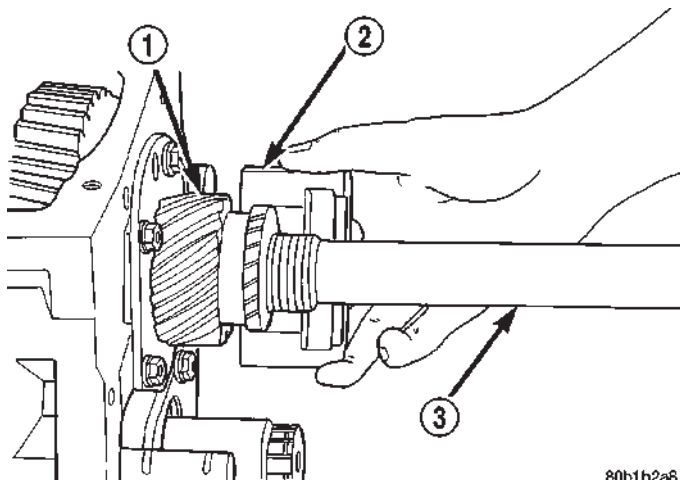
First Puller Jaw On Mainshaft Fifth (Overdrive) Gear
